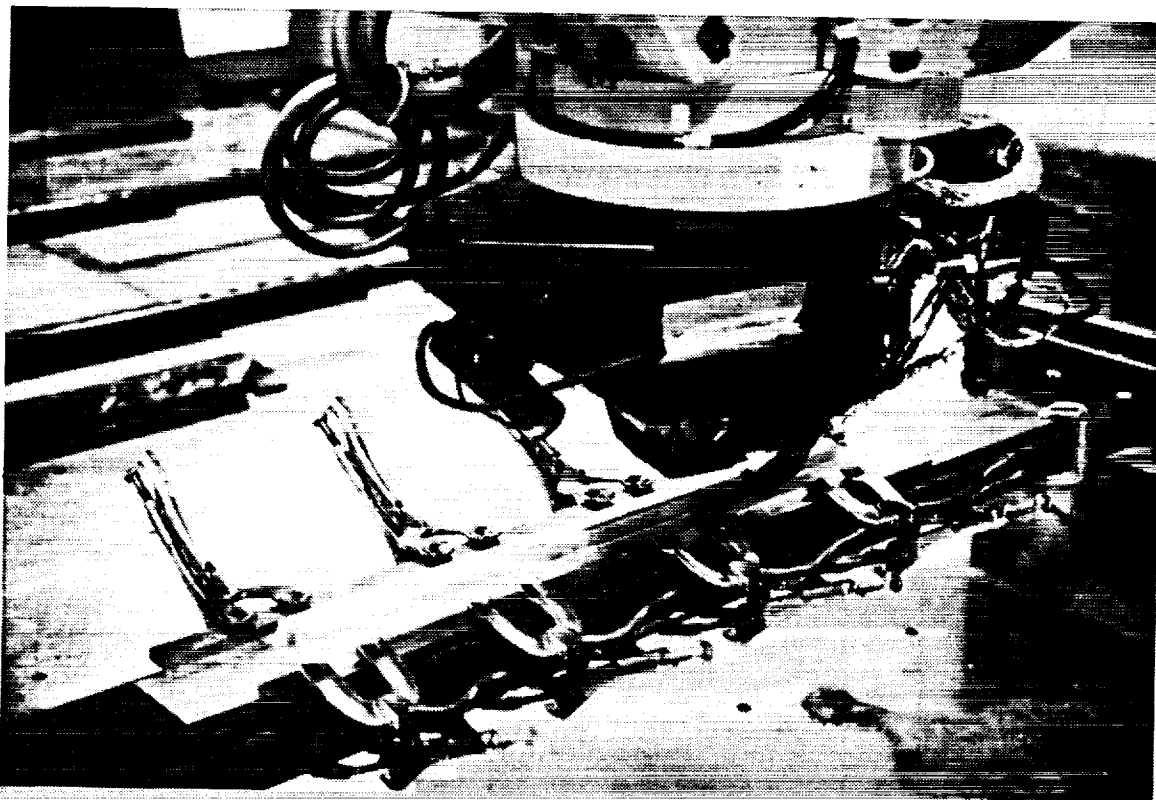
Photographs of Clamping Arrangement used to Weld Prototype Panels.
